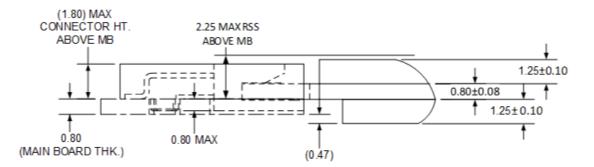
Stack-up Mid-mount (In-line) Double-sided (D2) Module for 1.35 Maximum Top-side Component Height
